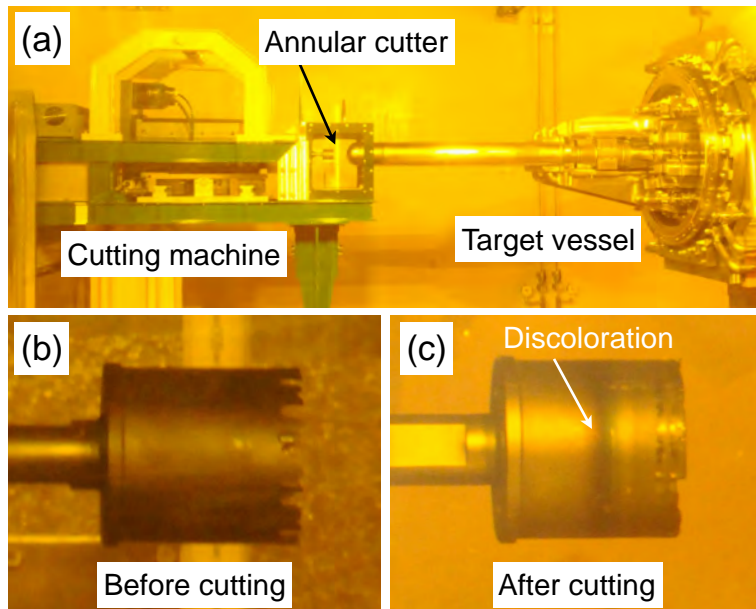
Photographs of (a) target vessel cutting machine, annular cutters (b) before and (c) after cutting.
